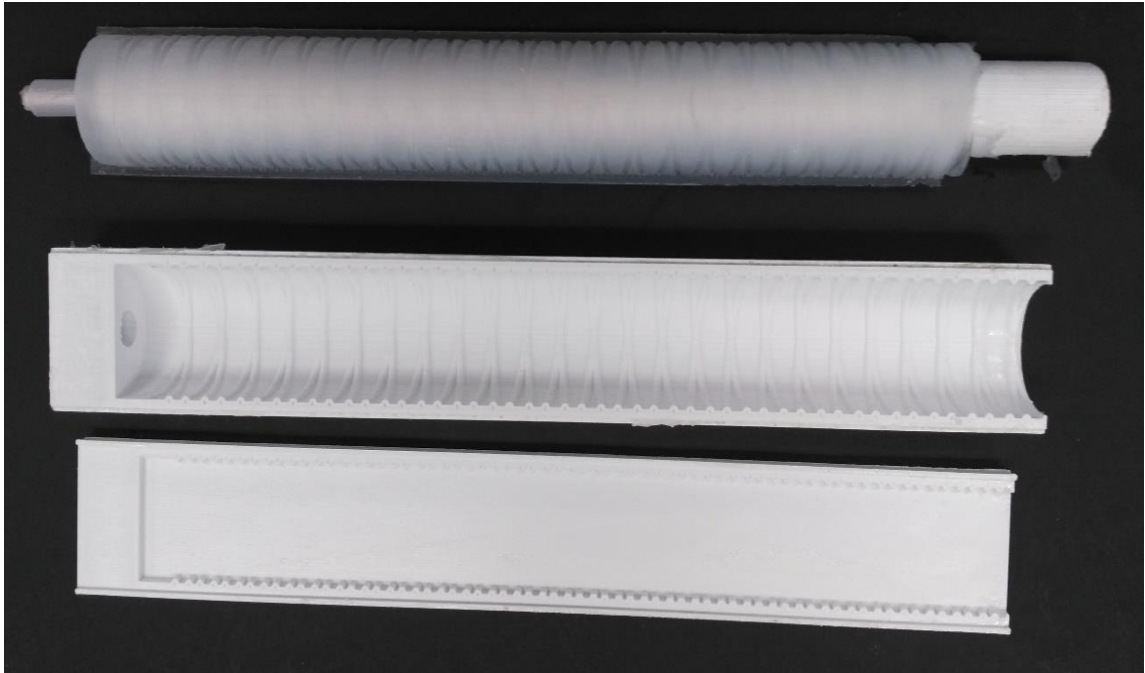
First stage of fabricating Fiber-Reinforced actuator winding spacing 5-mm.
